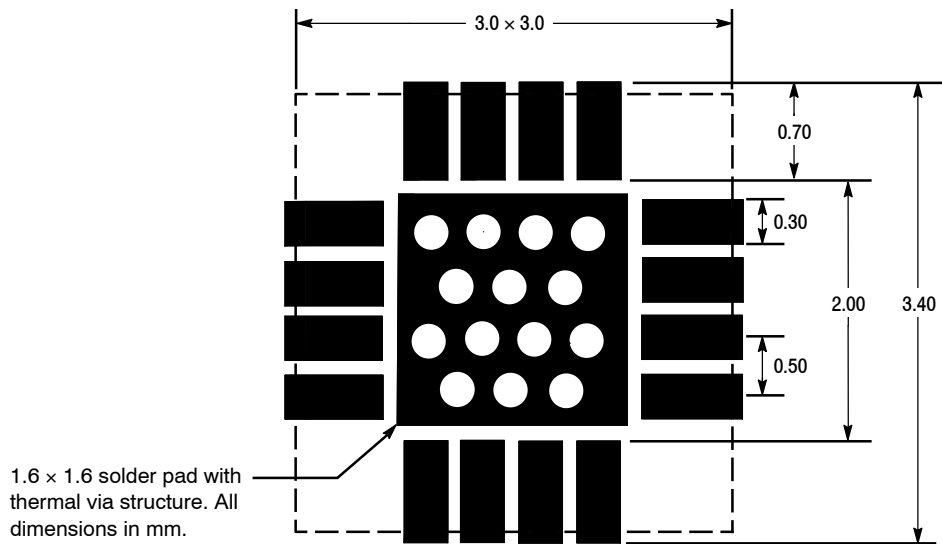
PCB Pad Layout for QFN 3 × 3, 16 Lead
